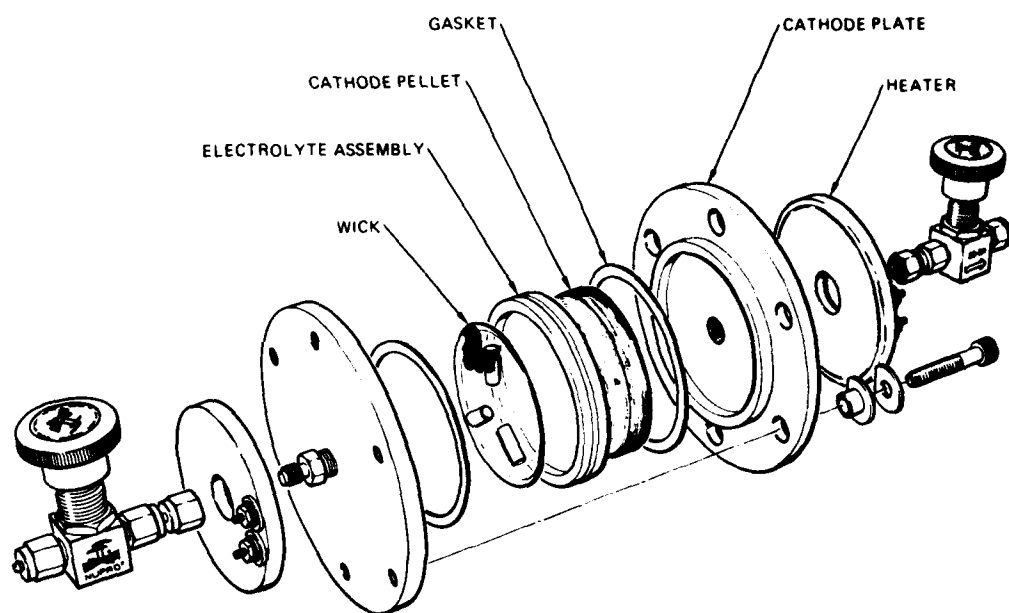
Expanded View of Boiler-Plate Test Cell
